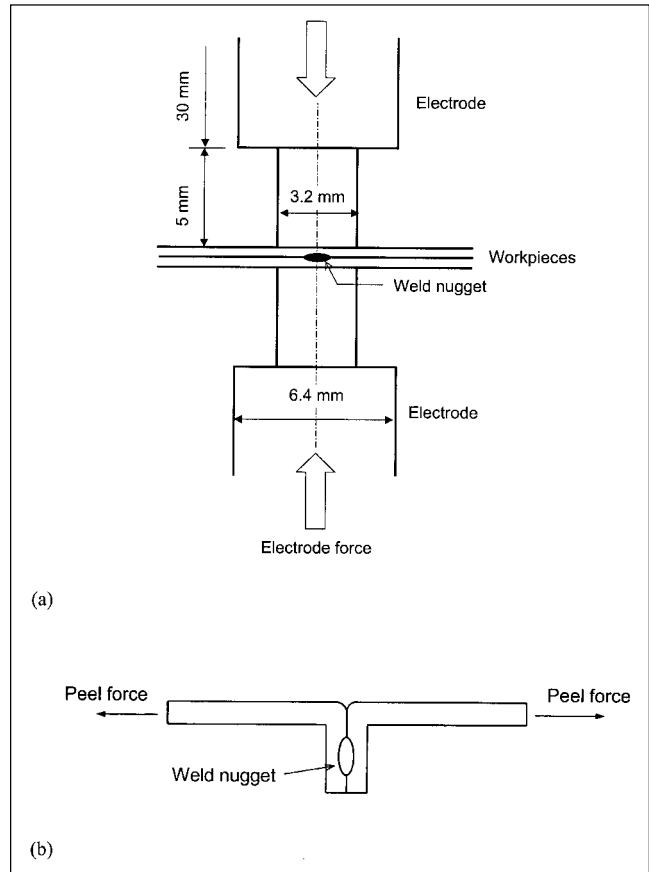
Schematic of setup for (a) resistance spot welding and (b) peel test.
